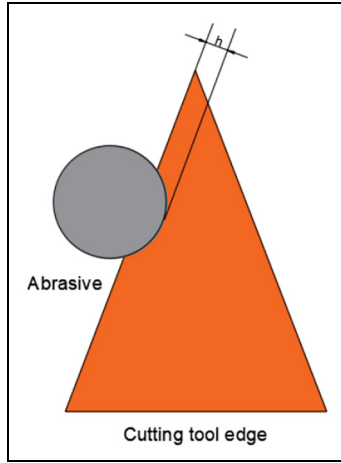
The impact depth of a single abrasive particle on the cutting tool edge.
